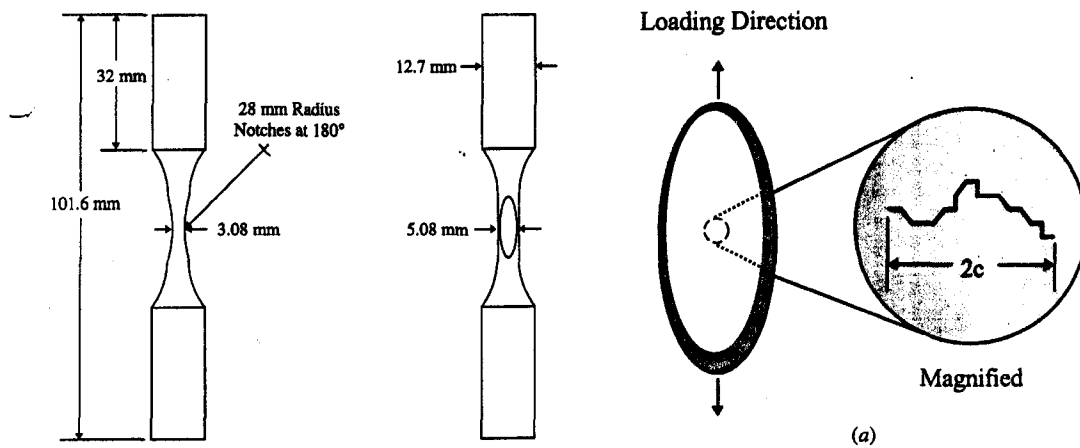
Dimensions of the axial fatigue specimen with 28 mm radius polished notched surfaces [22].
